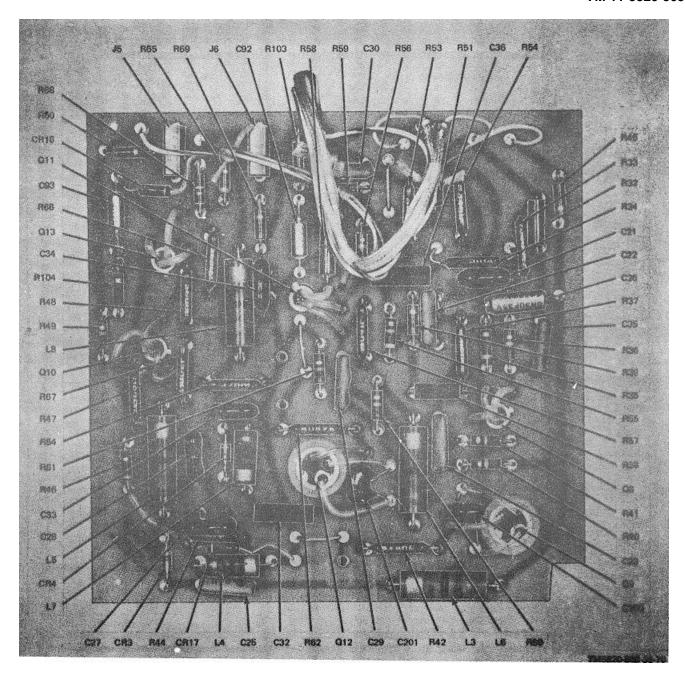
Oscillator Control C-4311/PRC-47 (A8A7), Card Assembly E2.
